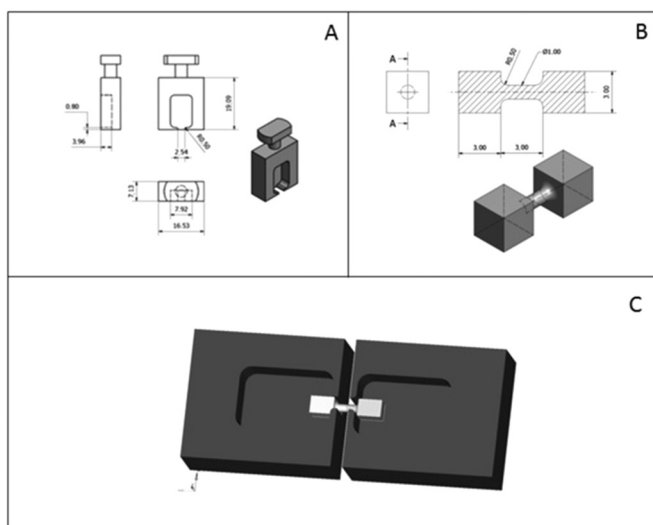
Dick's holder and dumbbell shape specimen. Technical drawing of the holder (A) and of the specimen (B) and geometry of the assembled set (C).
